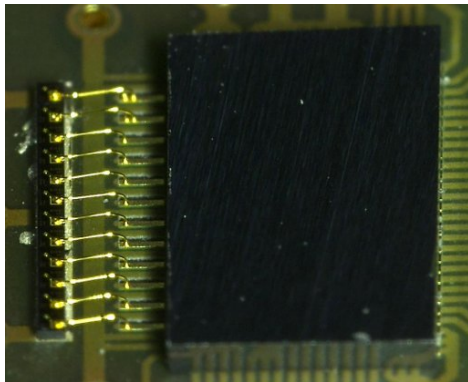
VCSEL diode array bonded and driver chip flip-chip soldered to a PCB.
